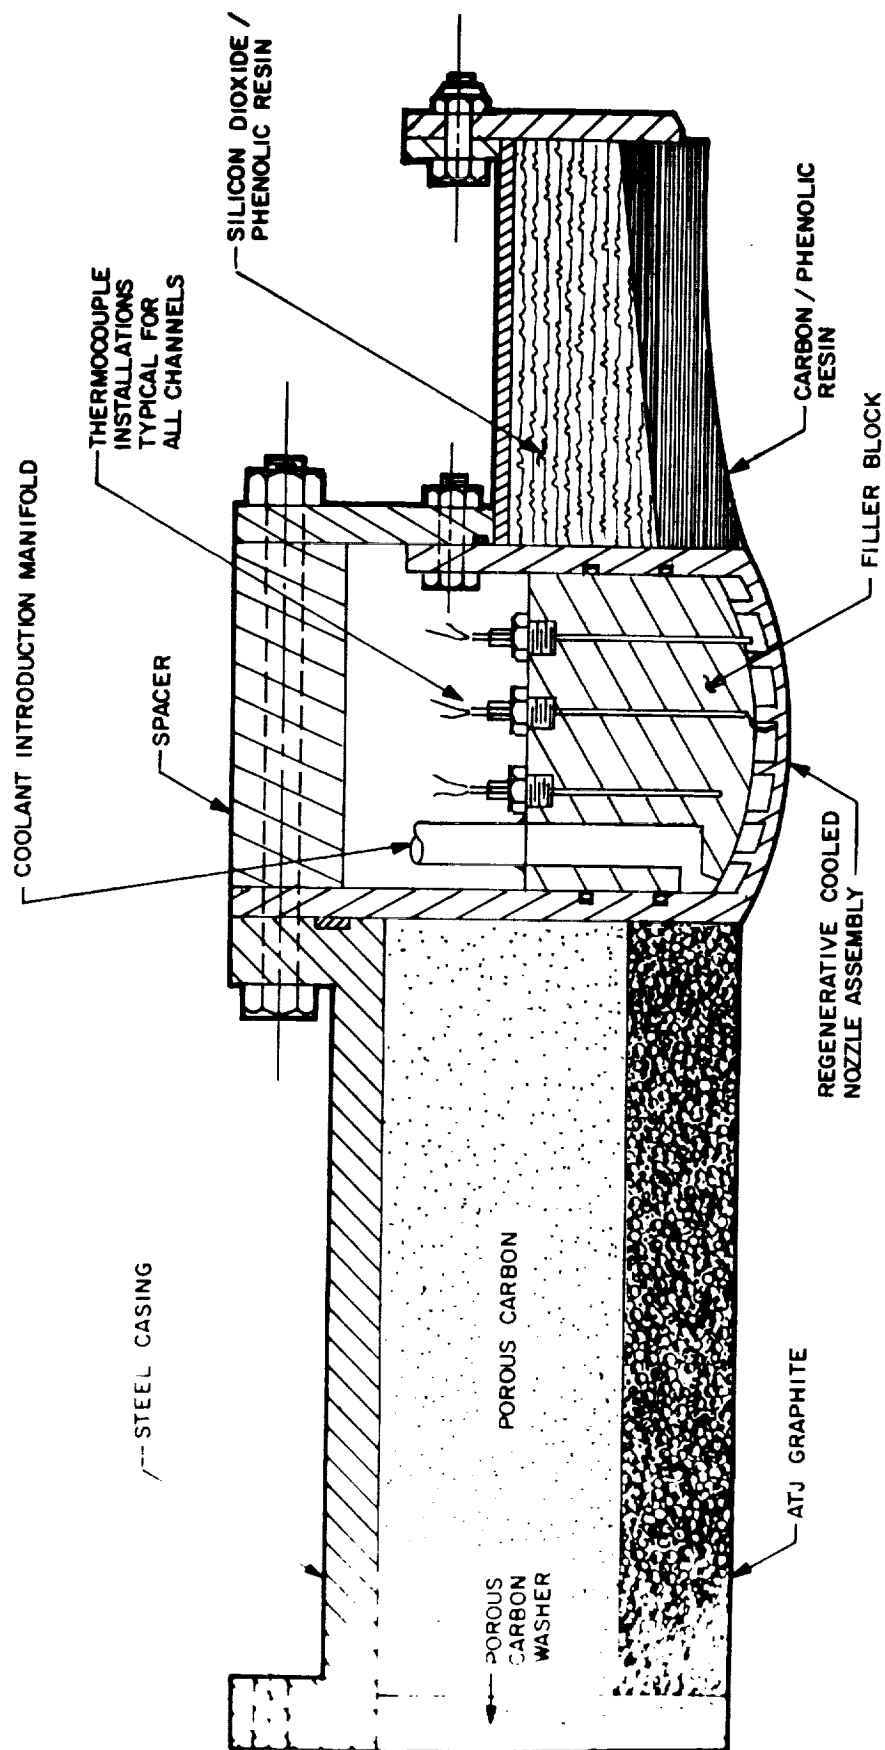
Cross-Sectional View of Ablative Thrust Chamber Assembly Used in Multiple Restart and Chamber Pressure/Mixture Ratio Excursion Firings
